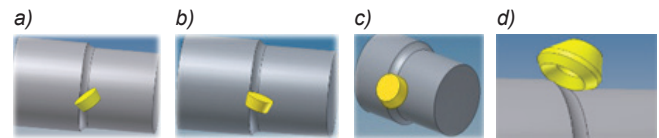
Selected cutting plate positions relative to the workpiece: a-b) the rake surface is the base of the cone (or roller); c) the rake surface is the cone surface; d) the geometry of the cutting plate is called the frustum
